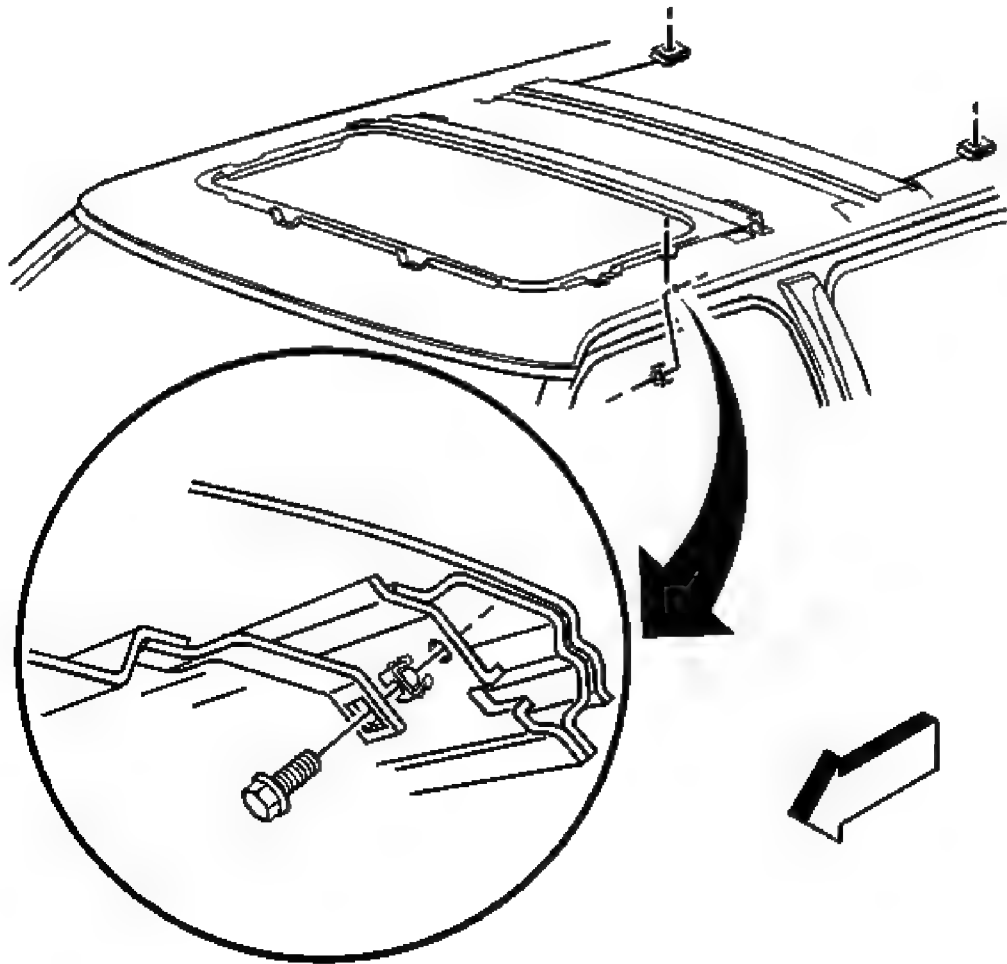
Installing Nuts On Roof Bow & Each Side Rail
